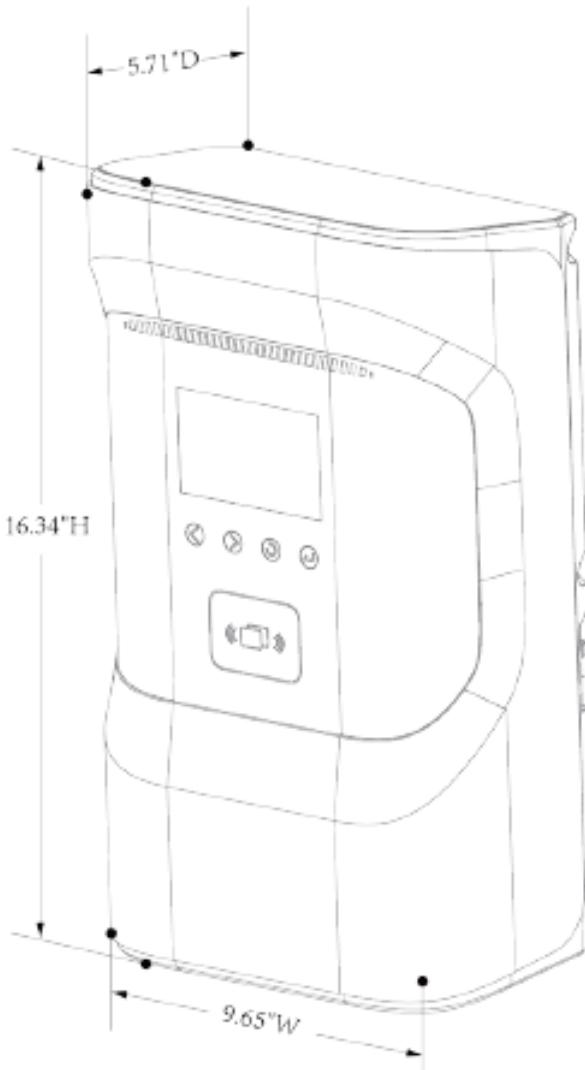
The shape & dimensions of ECA-NC4802S
